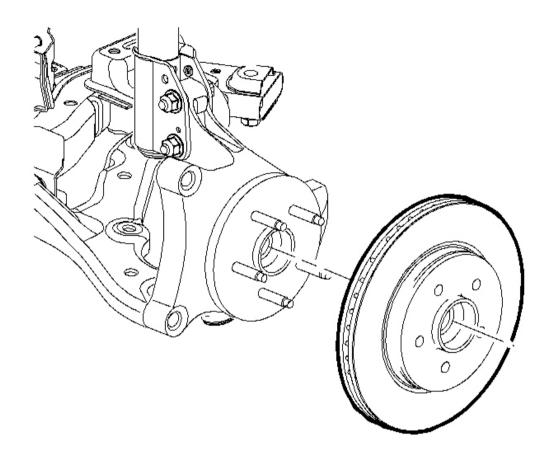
Front Brake Rotor Courtesy of GENERAL MOTORS CORP.
